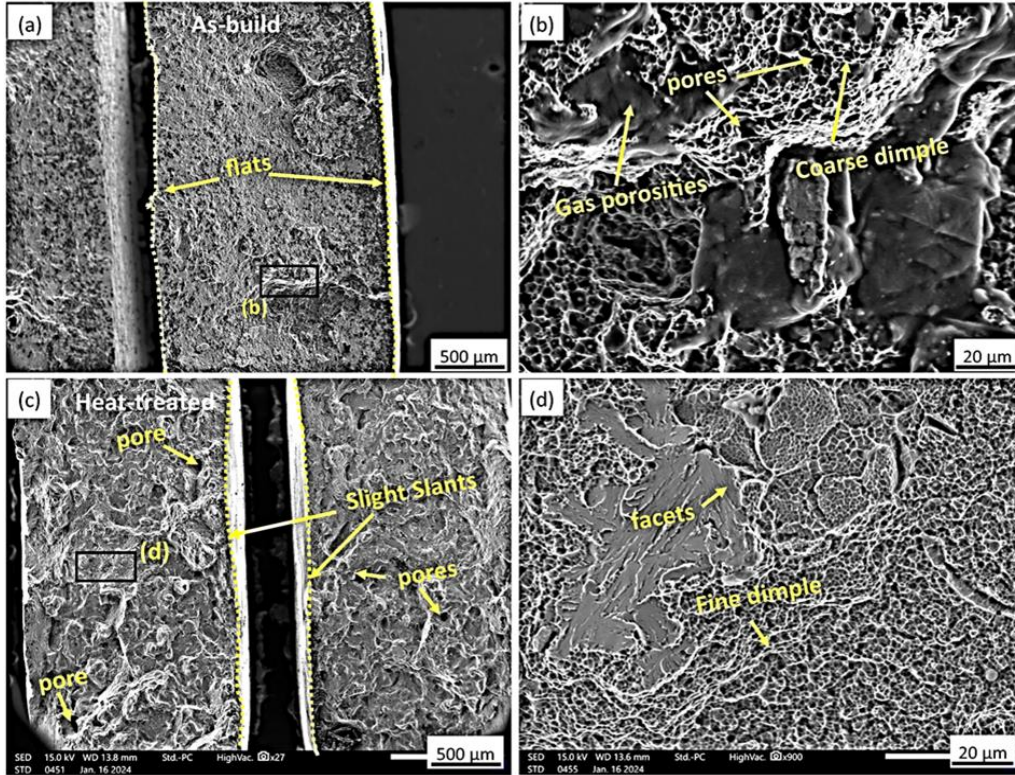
Fracture surface analysis of AISI 4130 deposited parallel to build direction subjected to tensile testing (a), (b) As-built condition, and (c), (d) Heat-treated condition.
